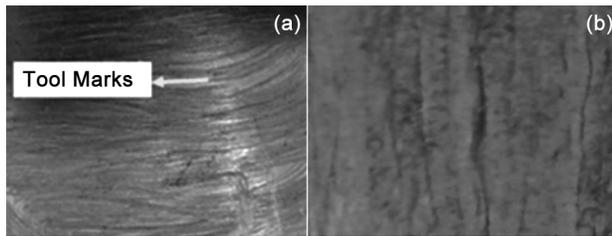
Surface examination of part (a) Hemispherical rigid tool, (b) Roller ball tool.
